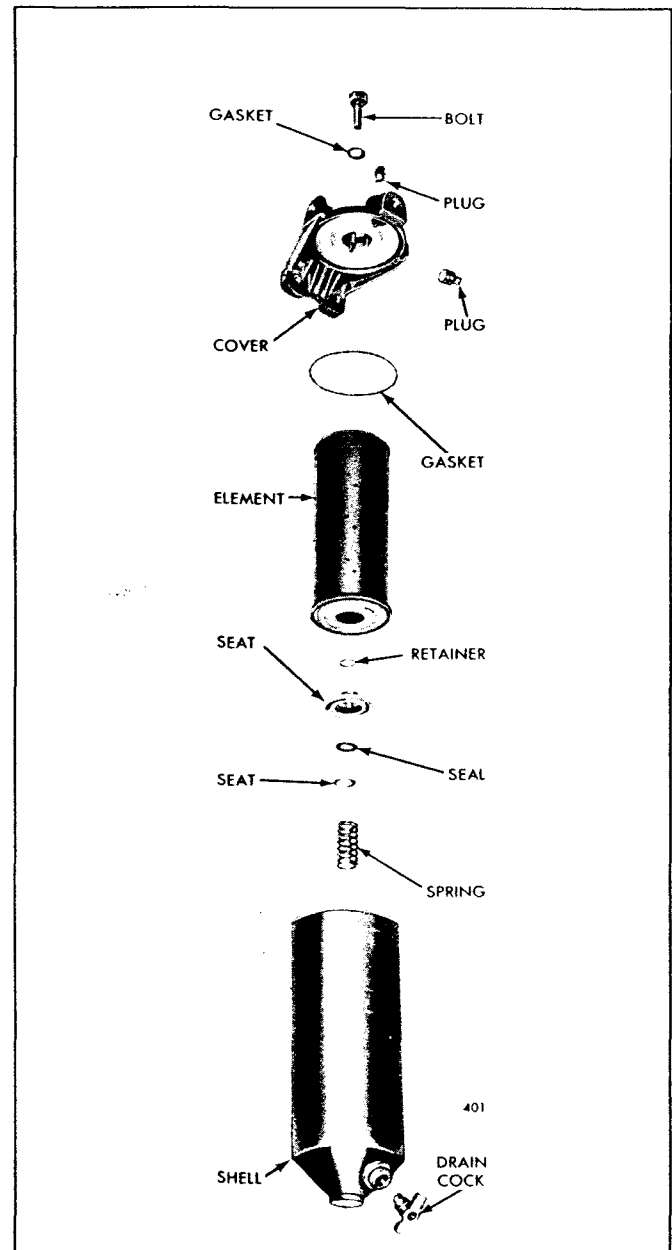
Fuel Filter Details and Relative Location of Parts
